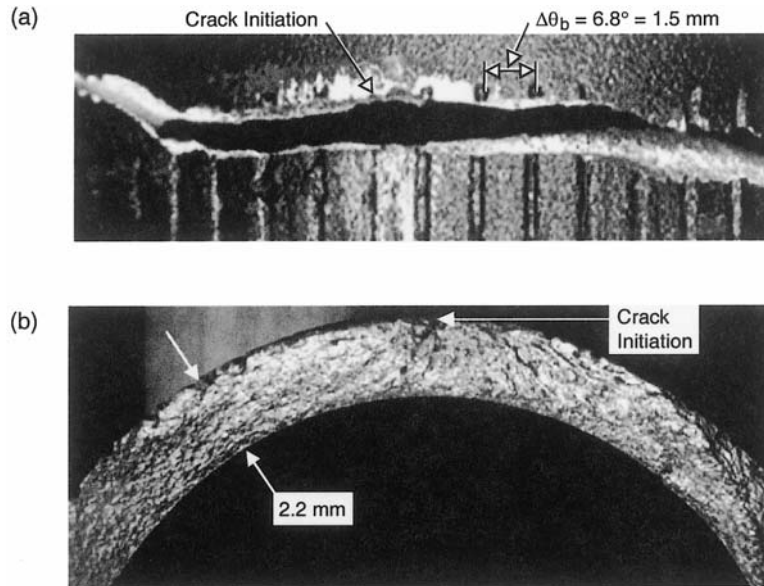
a)* Outer surface of a handlebar failed in constant amplitude load fatigue, and *b)* fracture surface of the handlebar shown in *(a)*.
